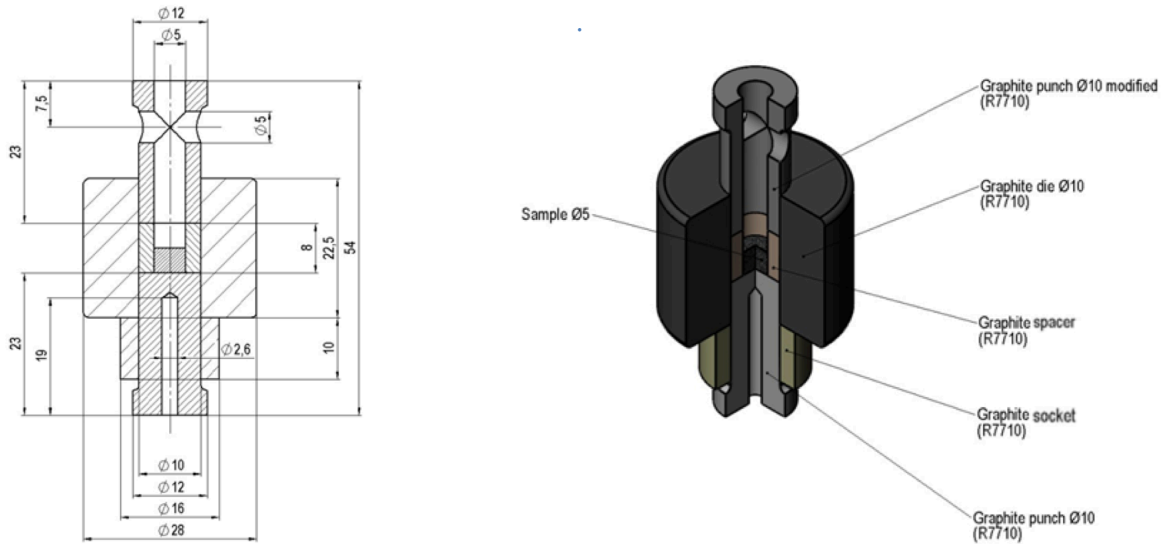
Technical drawing of the set-up developed for performing the CTR in SPS. The upper graphite punch contains a hole to enhance the release of CO as soon as is produced. The inner graphite spacer (in brown) is used to avoid any contact between the punches and the treated specimen.
